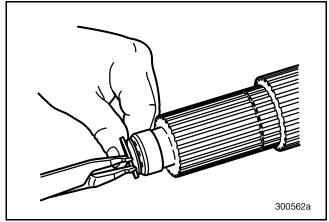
Removing Front Spigot Bearing Inner Race Snap Ring
